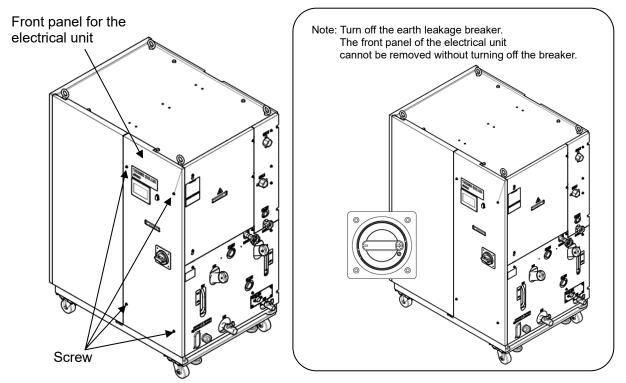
Remove the front panel for the electrical unit (For water-cooled type)
